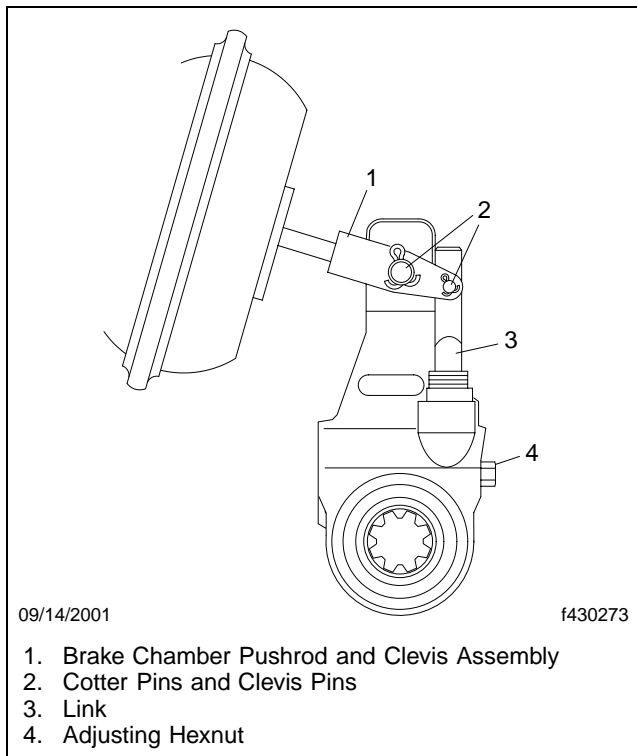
, Slack Adjuster (attached to welded clevis)
